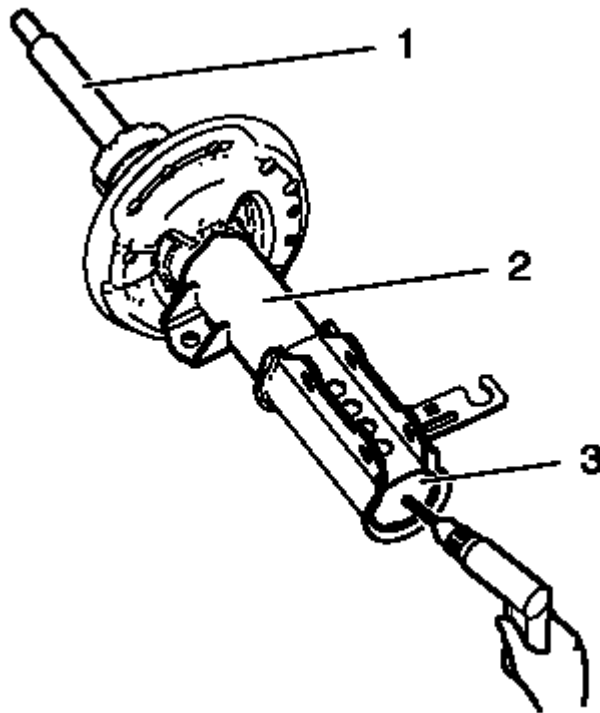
Drilling A Hole In Strut At Center Of End Cap Using Drill Bit
